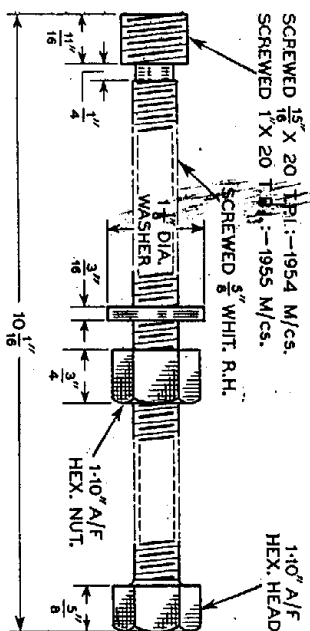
DRAW BOLT FOR FACILITATING DISMANTLING AND REASSEMBLY OF FORKS.
